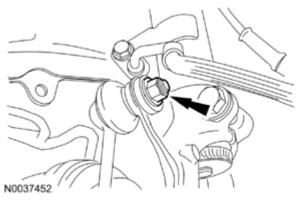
Locating Sway Bar Link Nut Courtesy of FORD MOTOR CO.
